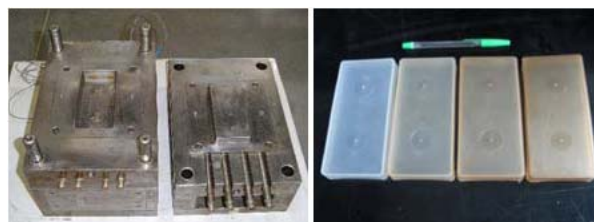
Hot runner mould and PP/nanoclay mouldings.
